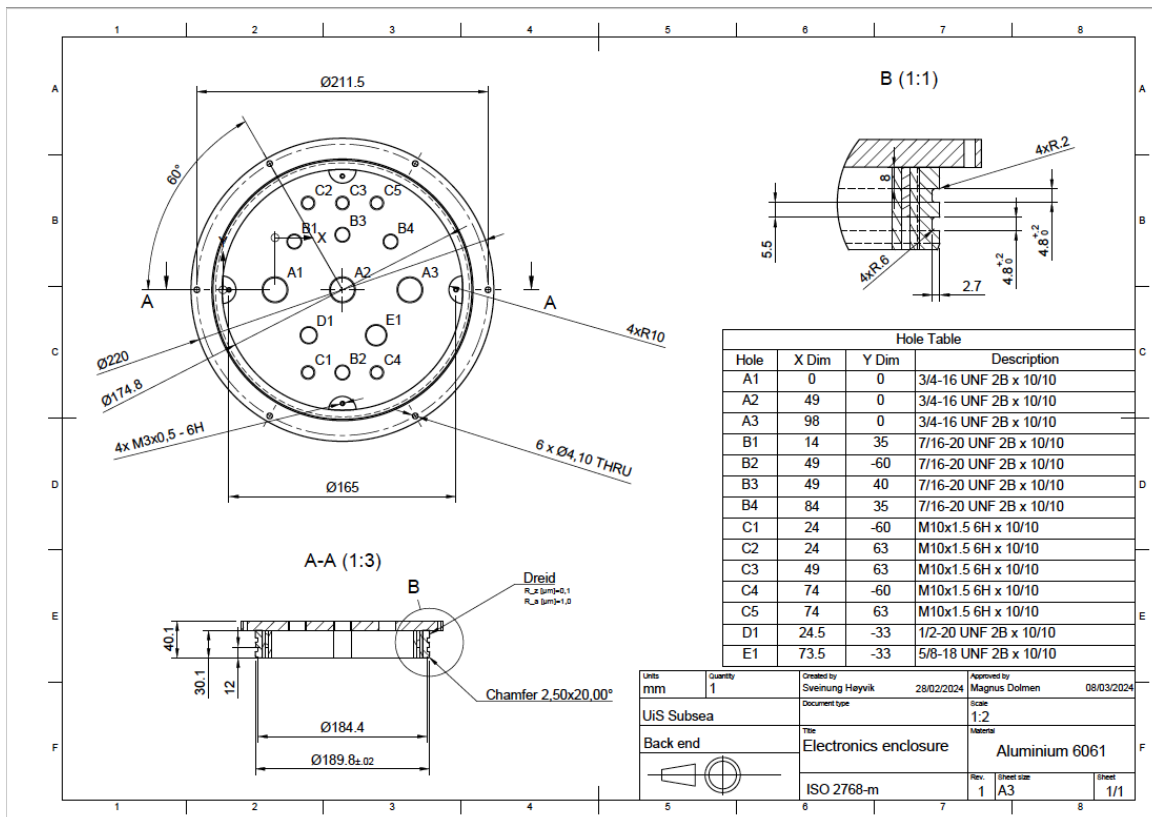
Technical drawing of the electronics enclosure's rear cap
